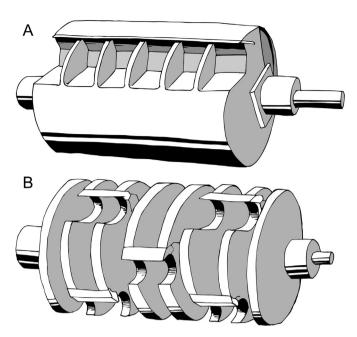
The two main drum chipper designs: closed drum with full-length knife (A) and open drum with staggered short knives (B).
